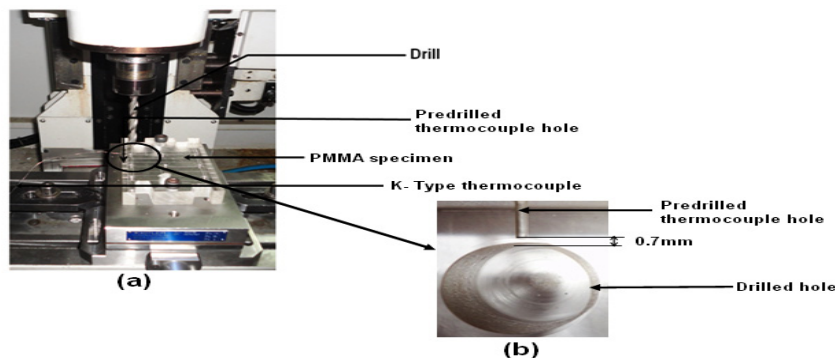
(a) Experimental set up and (b) enlarged view of the predrilled thermocouple hole and drilled hole.
